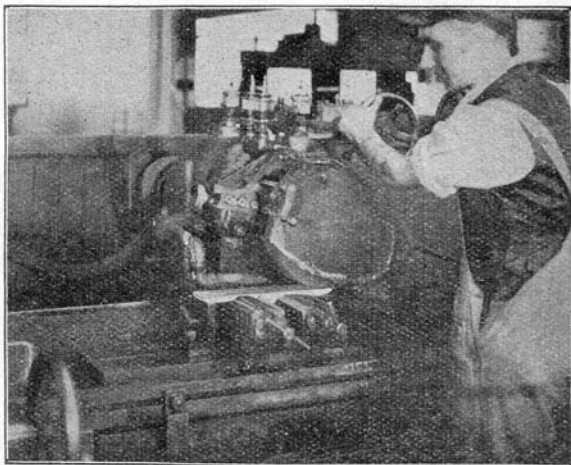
MACHINE WHICH GRINDS THE SOLE.
